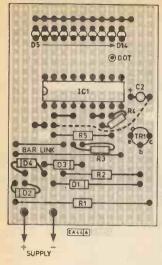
Alternative Component layout using stripboard (21 track cuts)
